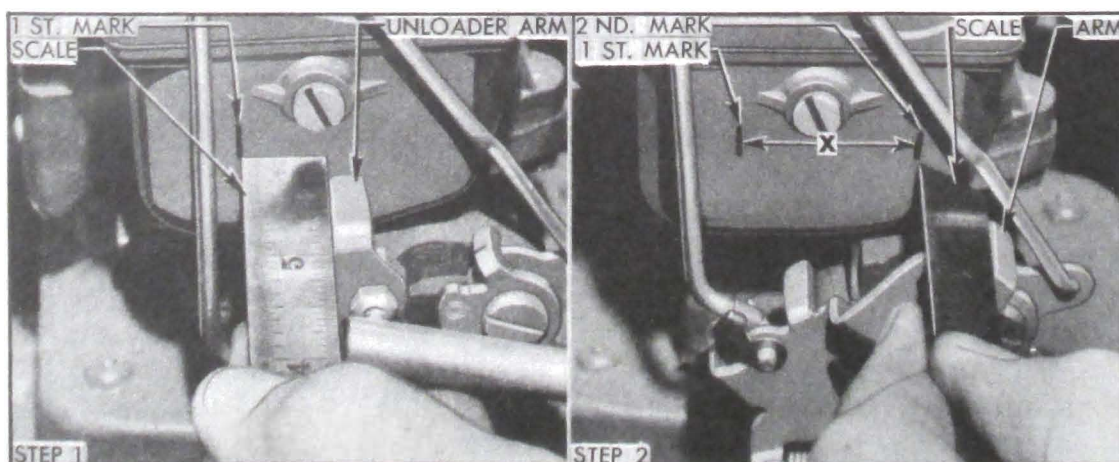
Checking Carter Accelerator Vacuum Switch Timing
